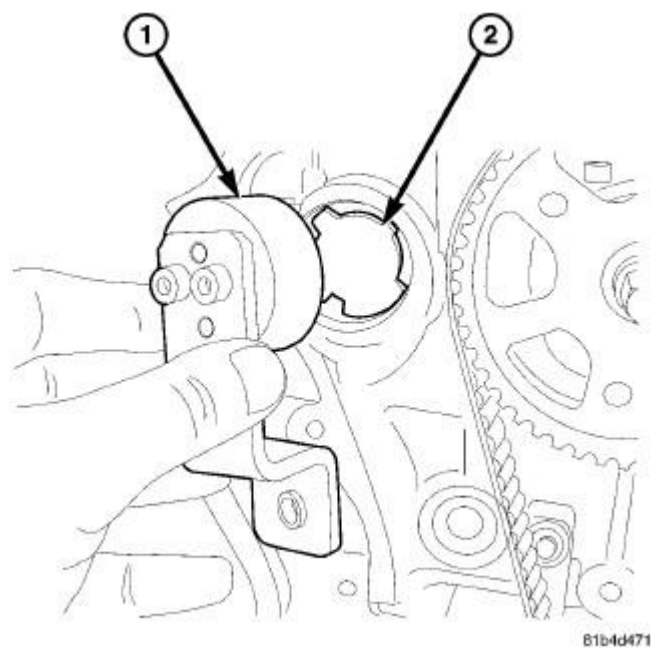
INSTALLING CAMSHAFT LOCK TOOL
